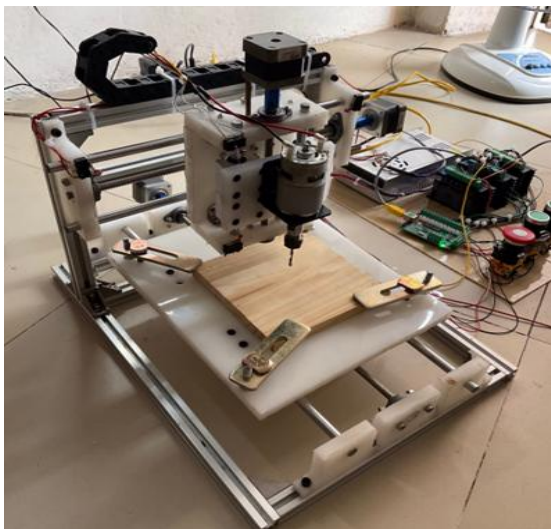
The completed 3-axis CNC wood engraving machine after full assembly
